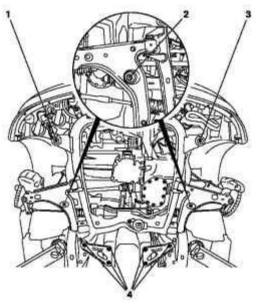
Removing the body of the front axle: 1, 2,3,4 - bolts fixing
